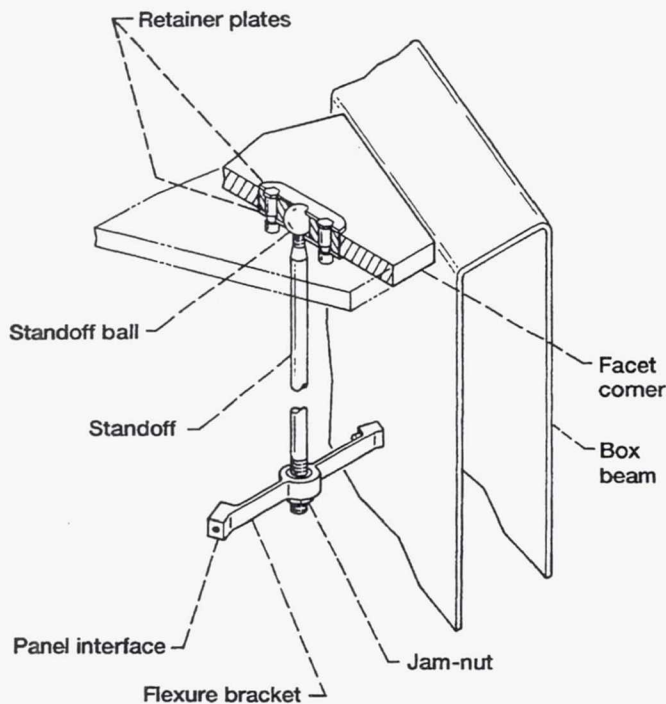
Standoff/flexure assembly for joining facet to panel.
